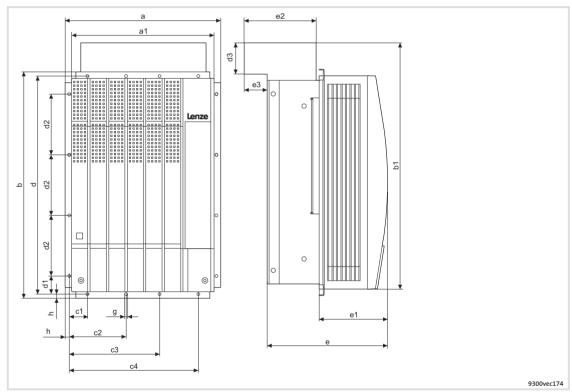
Dimensions for thermally separated mounting 55 kW
